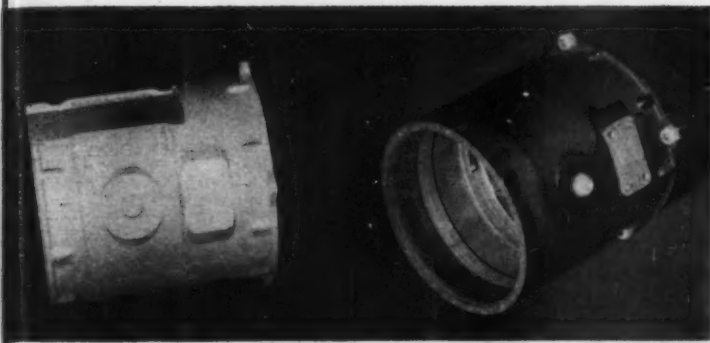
Section through a flight instrument housing shows insert of same alloy as housing die cast in place, left. Right, assembly shows smooth internal groove obtained by removal of insert by machining
